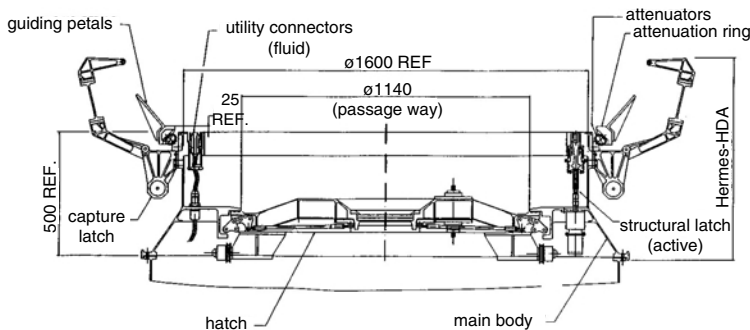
Example: Hermes–Columbus docking mechanism (courtesy ESA).
